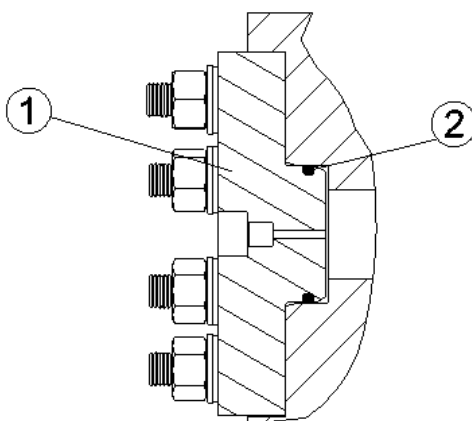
BLEED OFF DISCHARGE FLANGE ASSEMBLY
